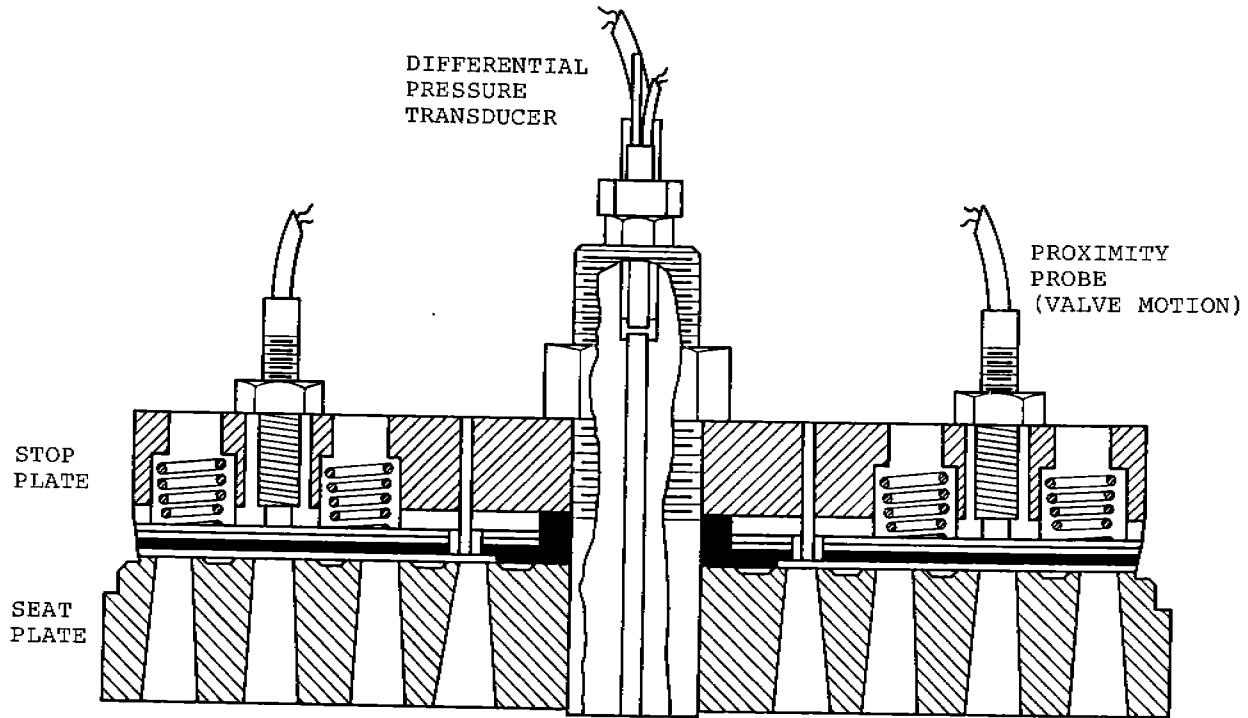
INSTRUMENTED PORTED-PLATE VALVE ASSEMBLY
